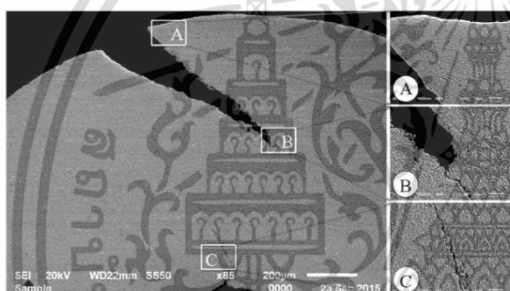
The cross-sectional SEM failure mechanism of the LD-rolling TRIP780 steel with the 75° bending angle: (A) the outer, (B) central, (C) inner regions.
